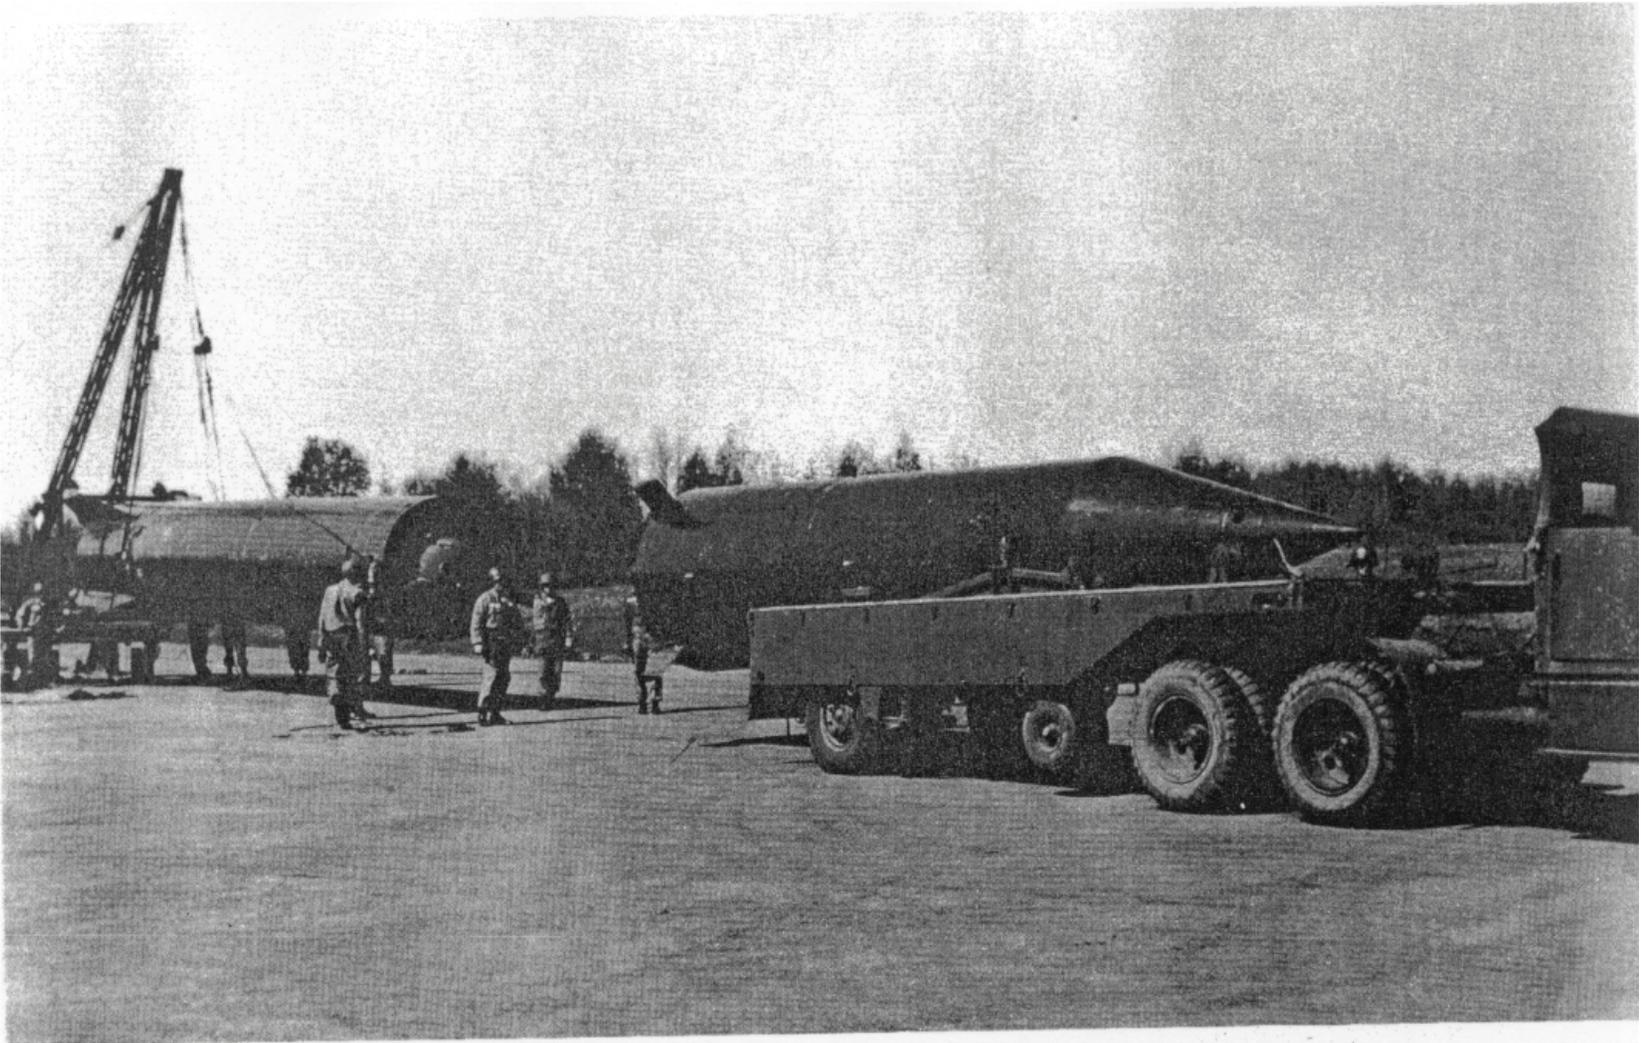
During missile assembly, the erector-servicer holds the missile thrust unit while the body unit is properly positioned by maneuvering the body unit (warhead and aft unit) trailer.
